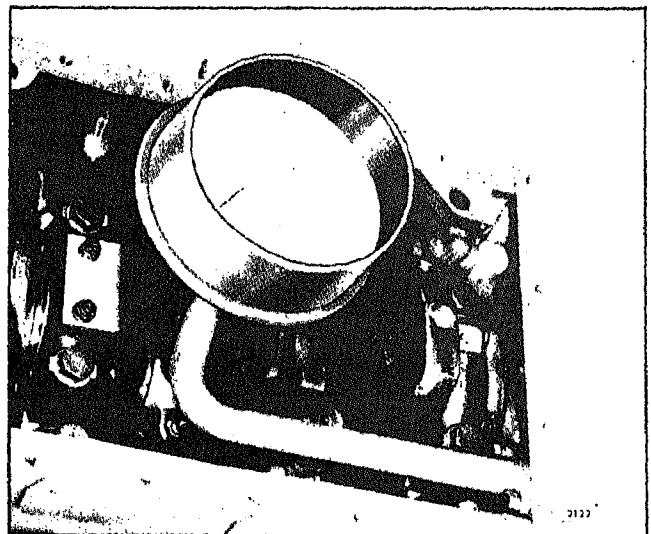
Typical Oil Pump Inlet Pipe and Screen Mounting
